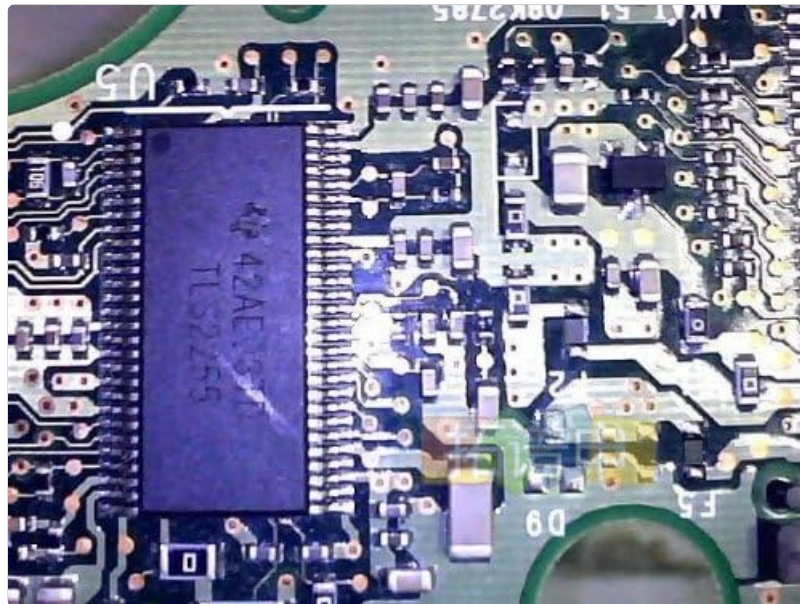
Detailed view of a Printed Circuit Board (PCB) showing the camera's magnification capabilities.
